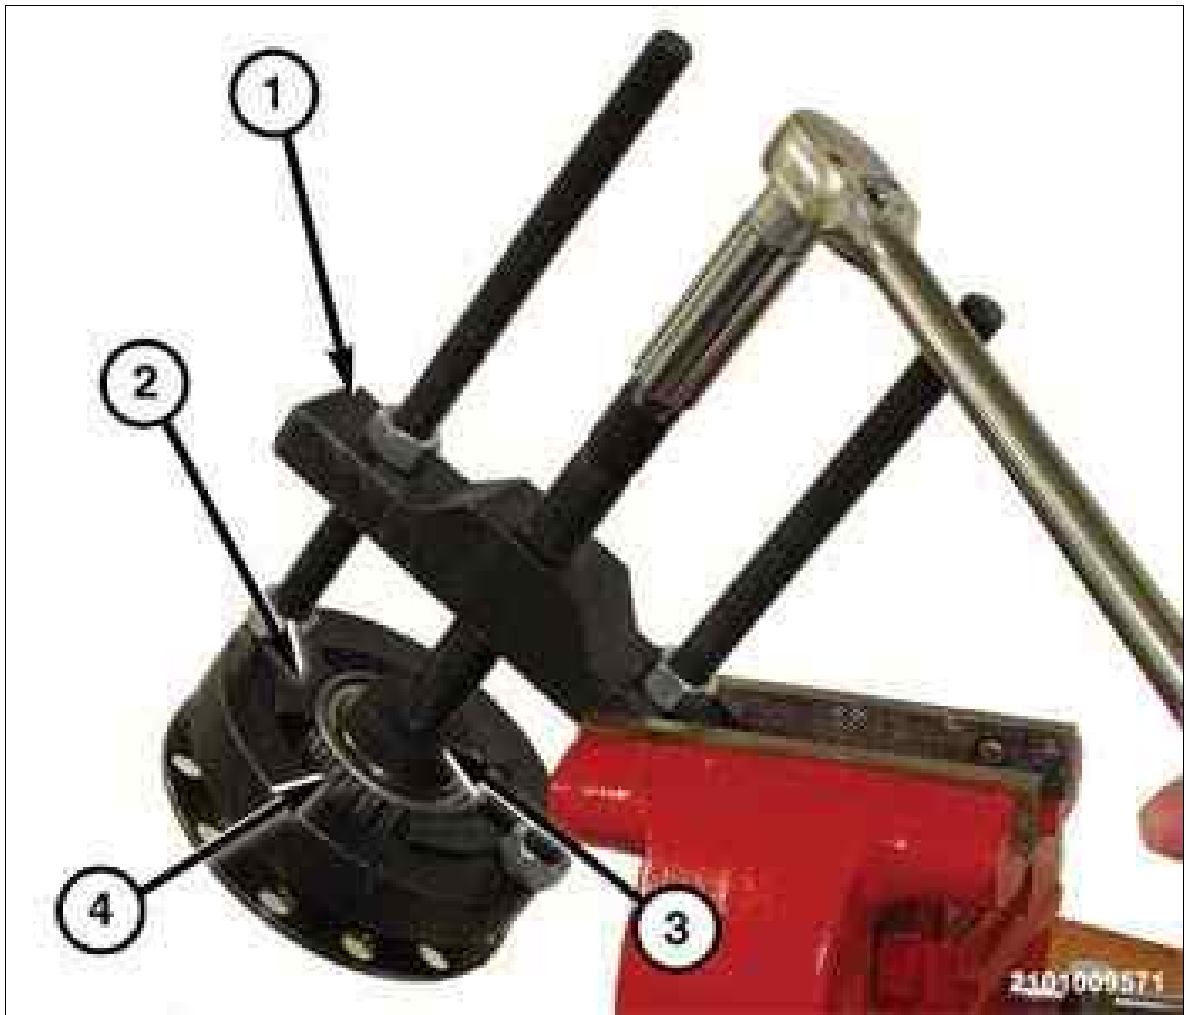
Removing Differential Side Bearings (Differential is Assembled)
